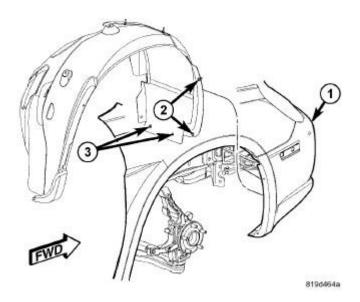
FRONT SPLASH SHIELDS Courtesy of CHRYSLER LLC
